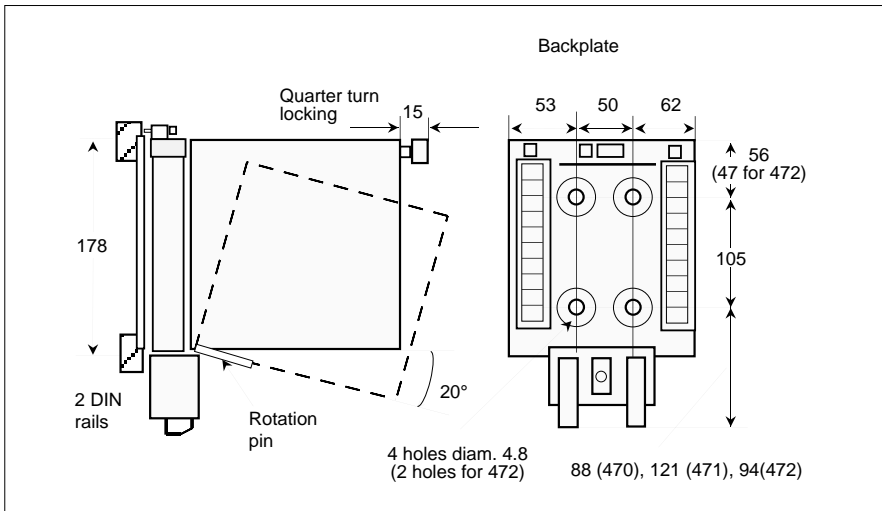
Dimensions for attachment to a vertical wall (mm)
